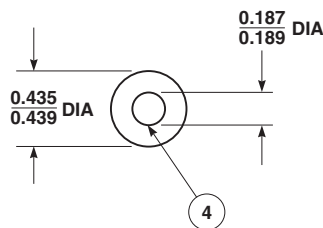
INSPECT EJECTOR RACK, BRU-22A/A, COMPONENTS (SHEET 1 OF 7)
